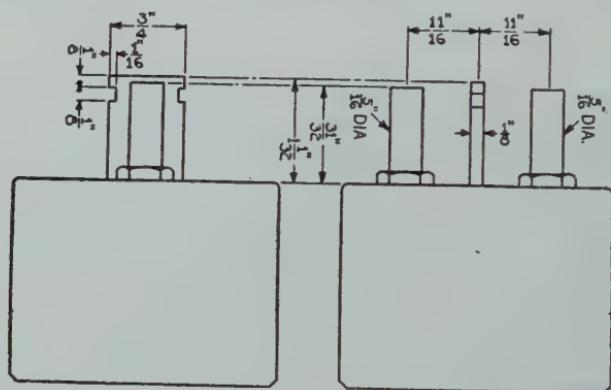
Essential dimensions, cathode, and base of high-power tube.
